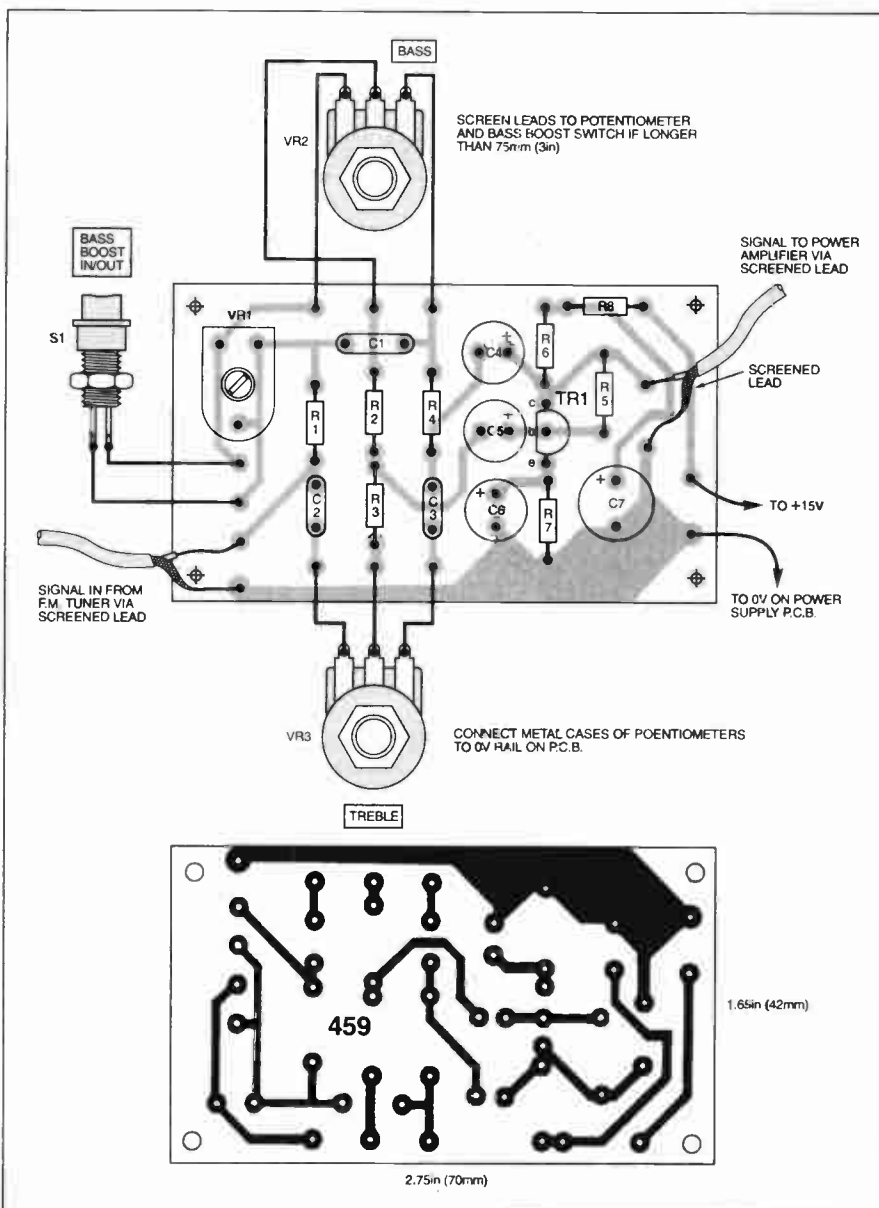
Printed circuit board component layout, wiring details and full-size copper foil master for the add-on Tone Control.
